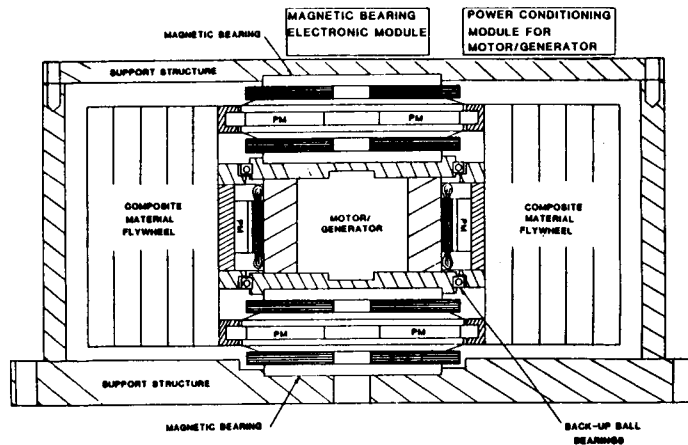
CROSS-SECTION OF 500 WH FLYWHEEL
